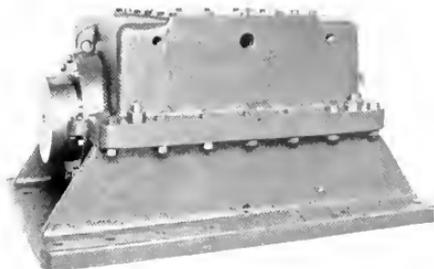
Spring Thrust Bearing and Housing with Dummy Shaft for Marine Propeller Shaft
